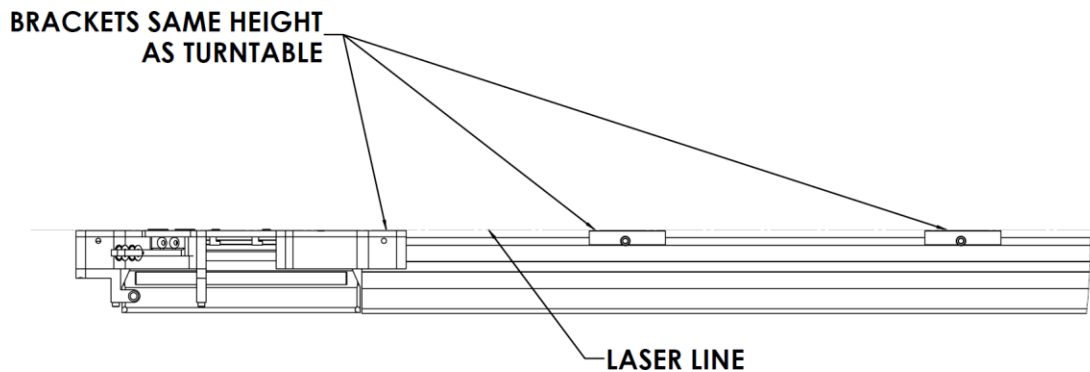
Install the Remaining Ceiling Track Brackets and Ceiling Track for the System at the Same Height as the Turntable
